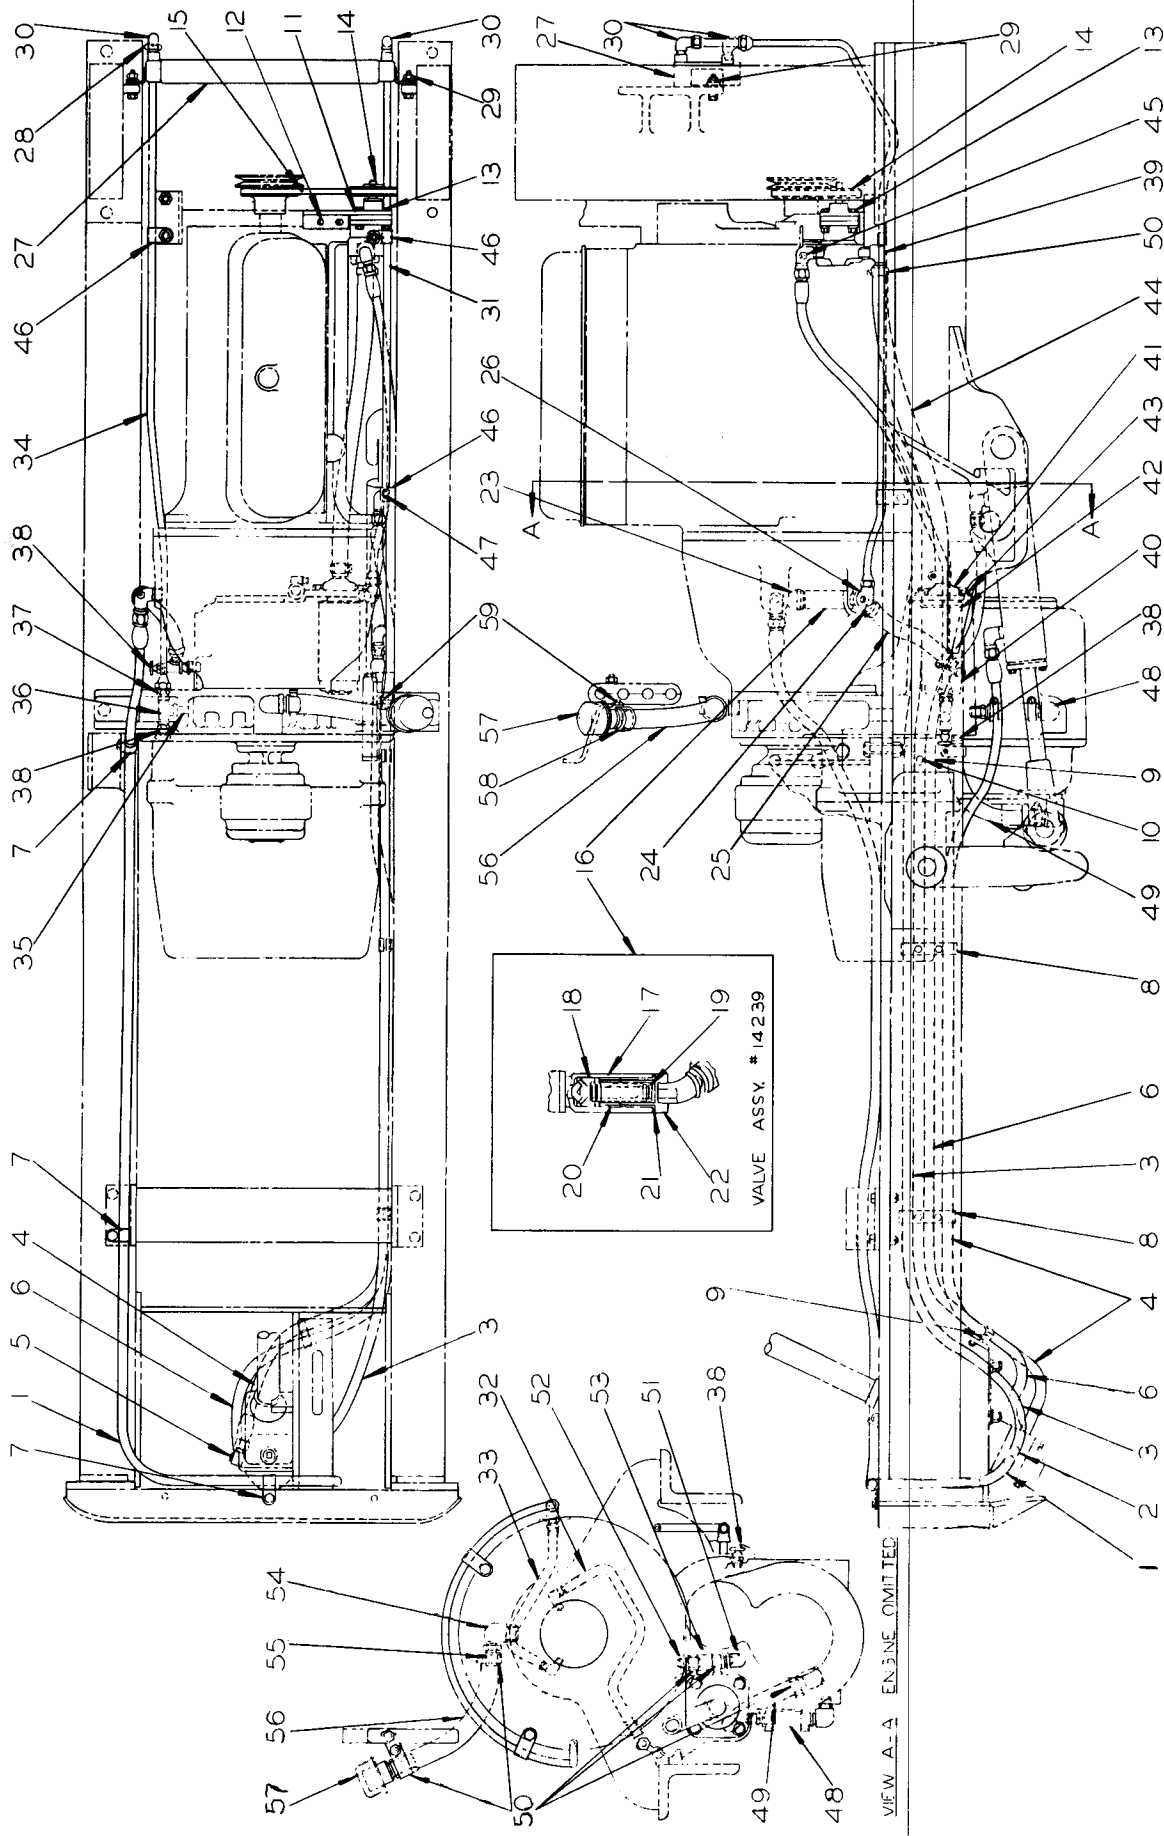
CONVERTER COOLING AND POWER STEERING LINES
